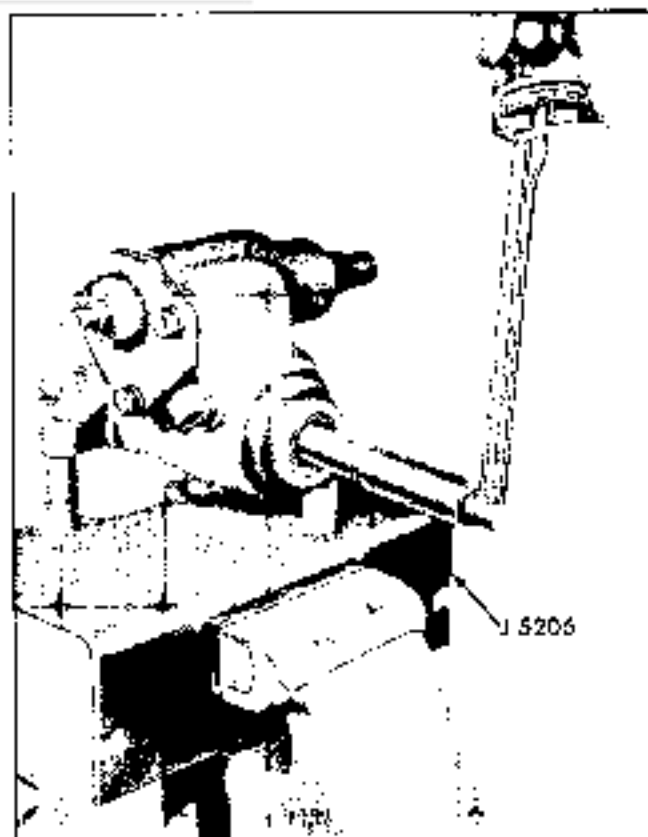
Adjusting Worm Gear Through High Point (in Fixture J 5206) - Gear Mounted
